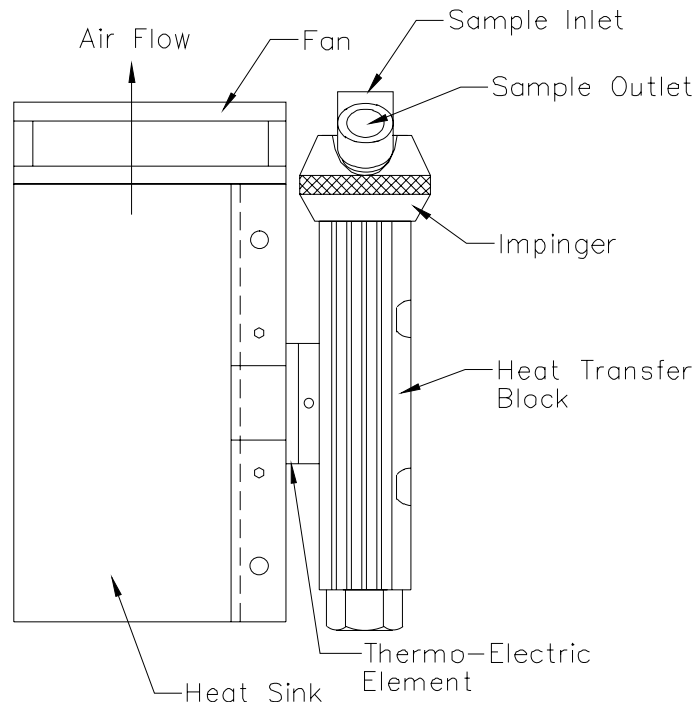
Heat Exchanger, Impinger and Heat Sink Assembly
